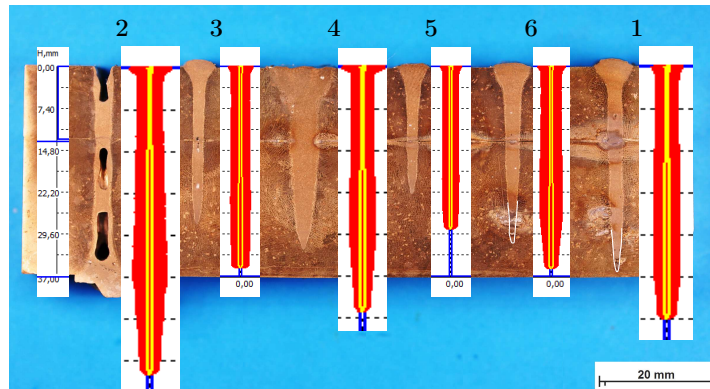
Section cut of bead on plate welds of a Cu80Sn20 specimen with a thickness of 37mm welded with parameters from Table 3.3
